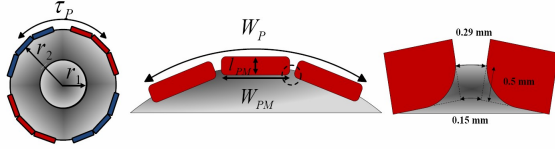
Rotor structure of the prototyped motor with permanent magnets
